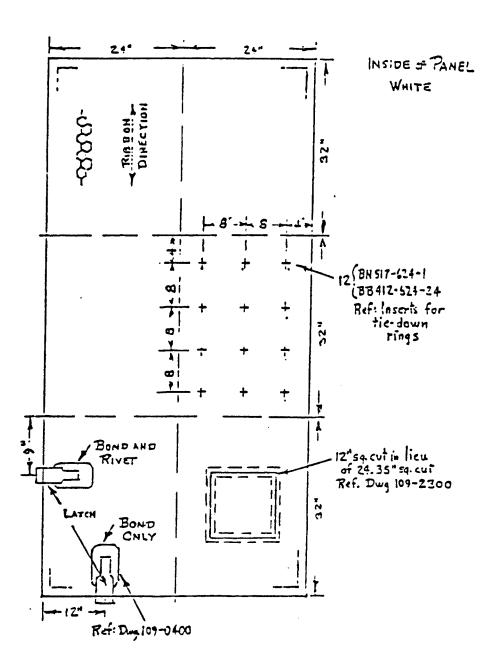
Inside of Hardware Panel Showing Location of Latches, Inserts, and Cut-out.
